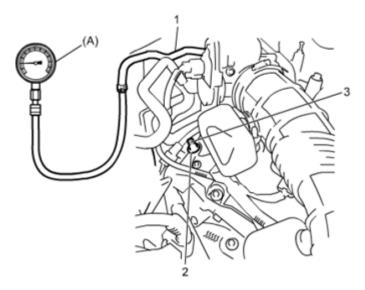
Connecting Special Tool (Vacuum Gauge) To PCV Hose Courtesy of SUZUKI OF AMERICA CORP.
